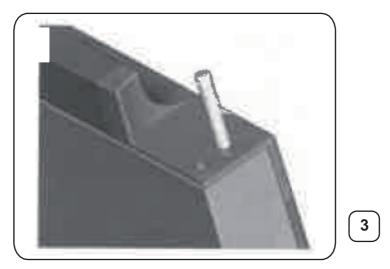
Insert the dowel into the hole of the upper hinge. You must use the inner hole.
